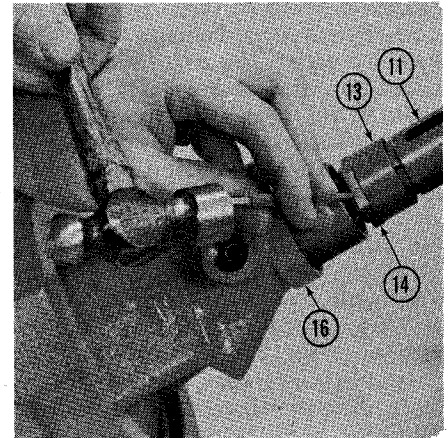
After installing steering shaft on Hydramotor actuator shaft, stake hex nut to slot in steering (11) with center punch.
